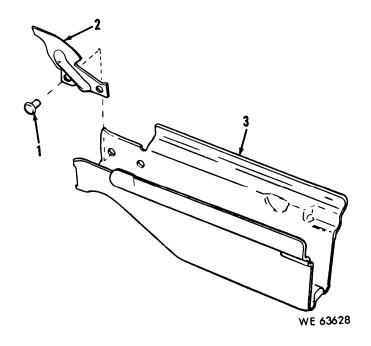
Trigger housing group, M3A1 onlyexploded view.
